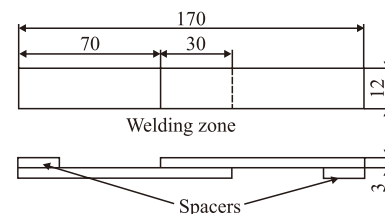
6061/7075 aluminum alloy welding specimens
